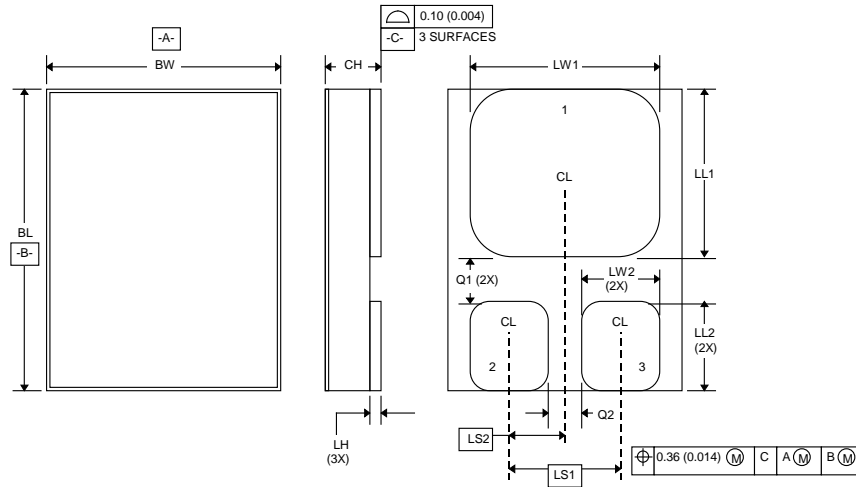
Physical dimensions JANHCB and JANKCB.
